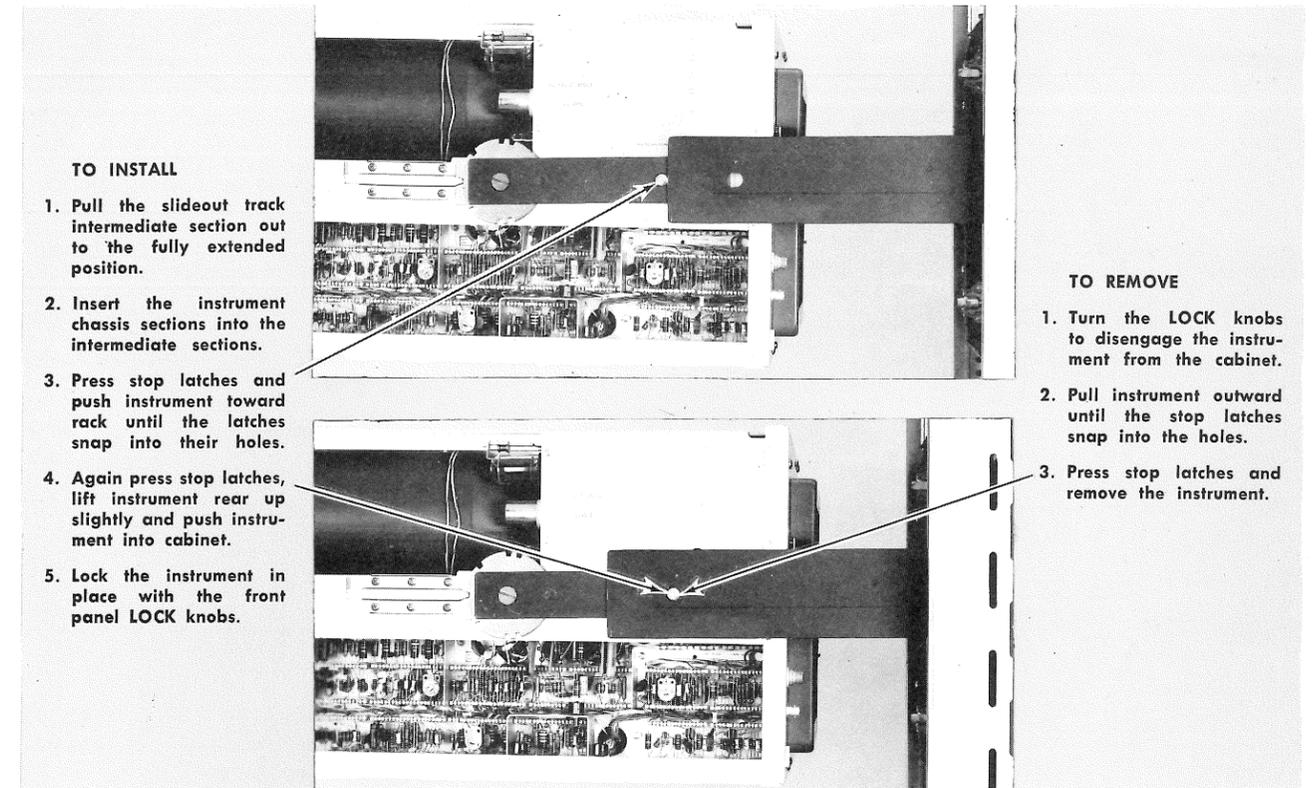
Illustration showing the slideout track assembly for the right side.
